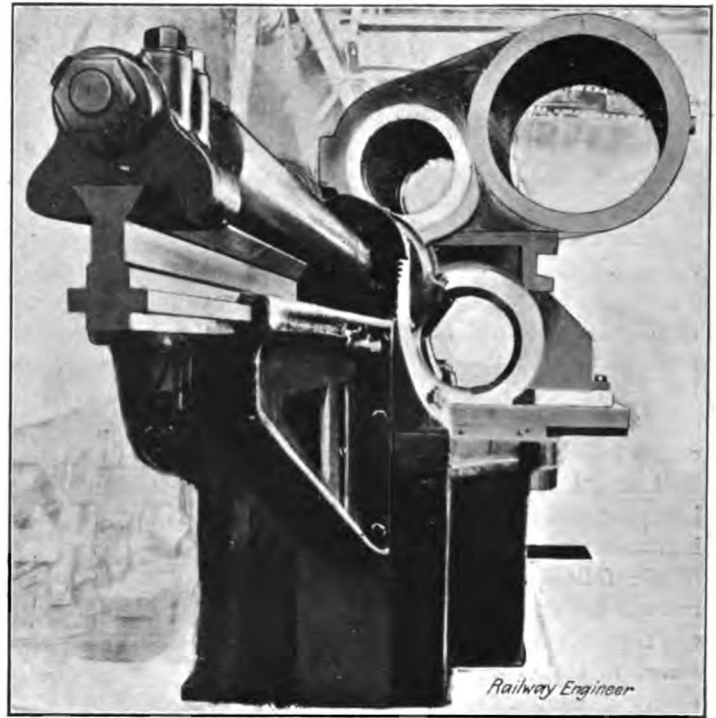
Casting set with Inclined Cylinder parallel to Boring Bar, showing Low Pressure Cylinder and Valve Chamber out of parallel.
